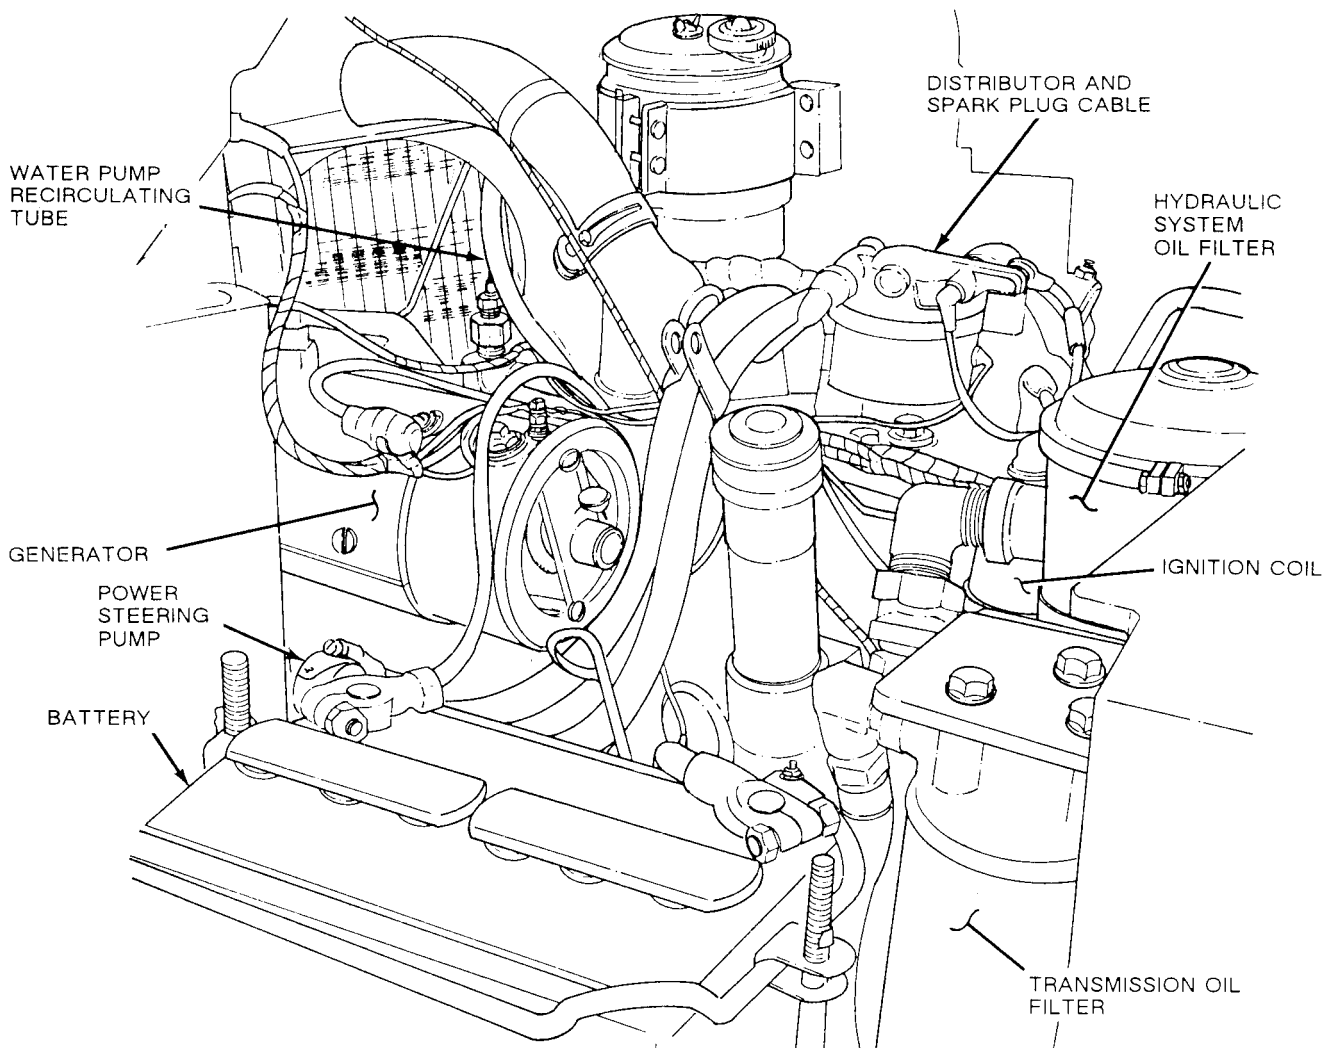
3/4 front right side of engine, installed view (model MHE-220).
